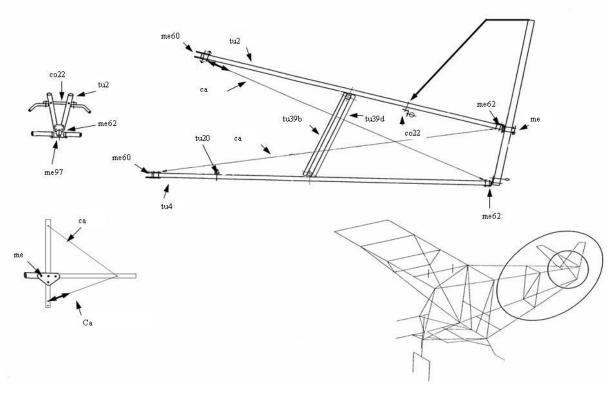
rear fuselage. Top left is top view of tailplane attachments, bottom left is rear view of half tailplane and fin.
